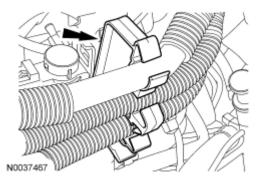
Locating Evaporative Emissions (EVAP) Tube Bundle Retaining Clip Courtesy of FORD MOTOR CO.
